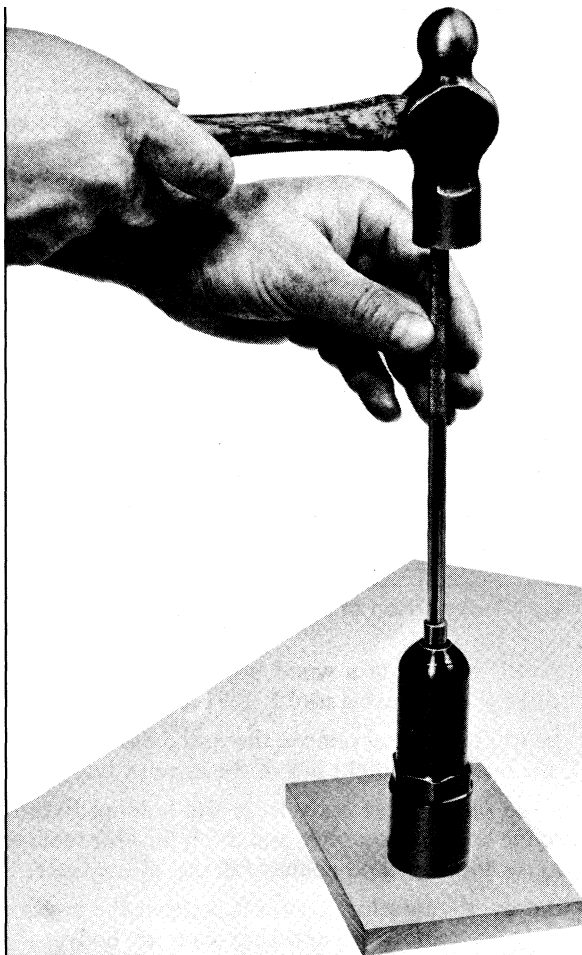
Removing Spray Tip from Injector Nut using Tool J 1291-02
